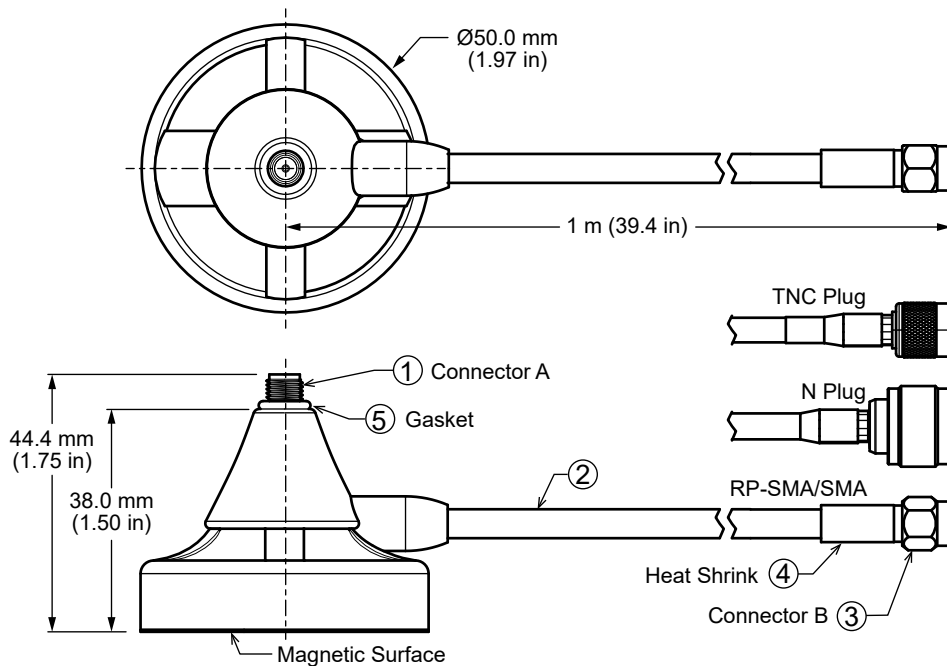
Product Dimensions for the ANT-MAG-SMAF-cccc-1 Cable Assembly
